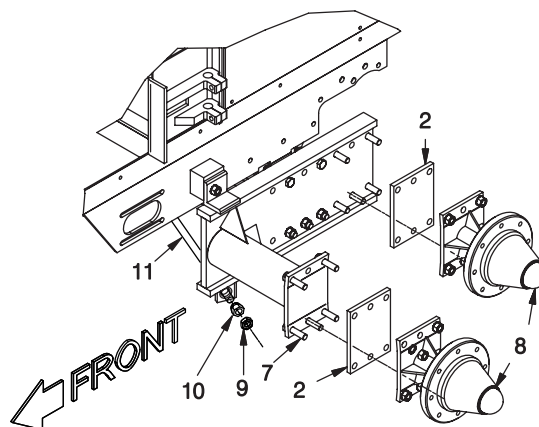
Mounting Spacer Plates, Hubs & Truss Rod
